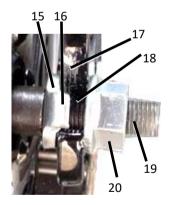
Correct installation of rear axle into fork. View from bottom UP.
